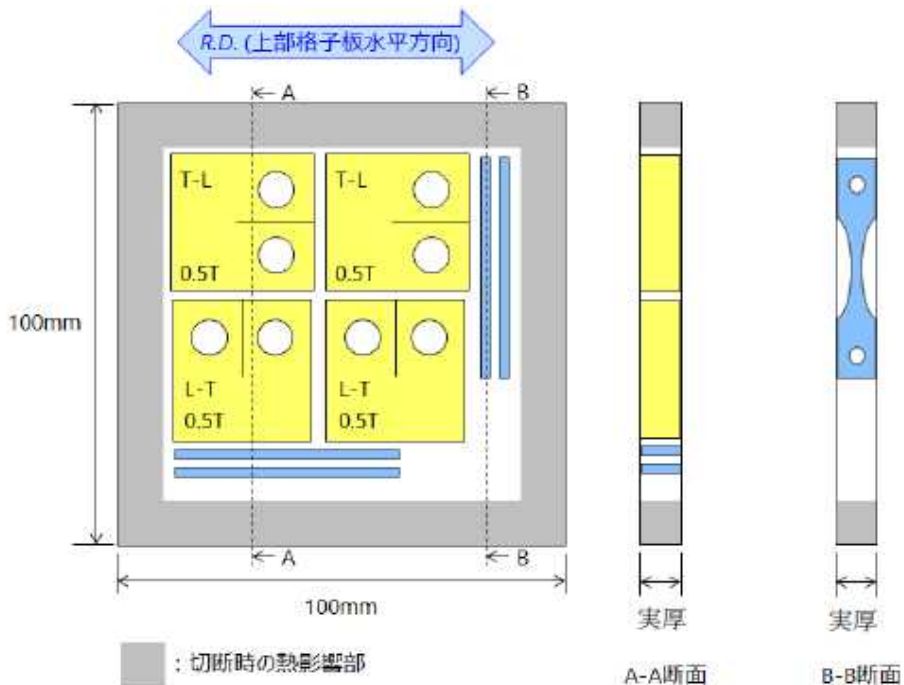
Plans for machining-out test specimens (core shroud 100 mm×100 mm specimen, 0.5T-C(T))
